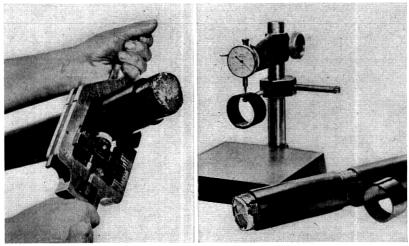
(Left) Removing test strip from end of cable; (right) performing micrometer measurements on test strip.
